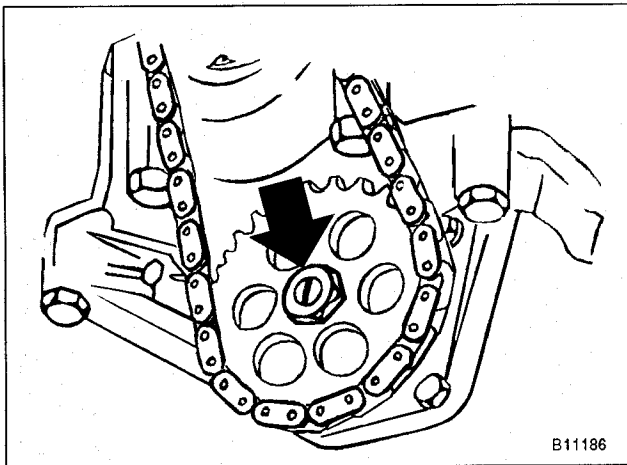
Oil pump sprocket mounting nut (left-hand thread) on 6-cylinder engine (arrow).
